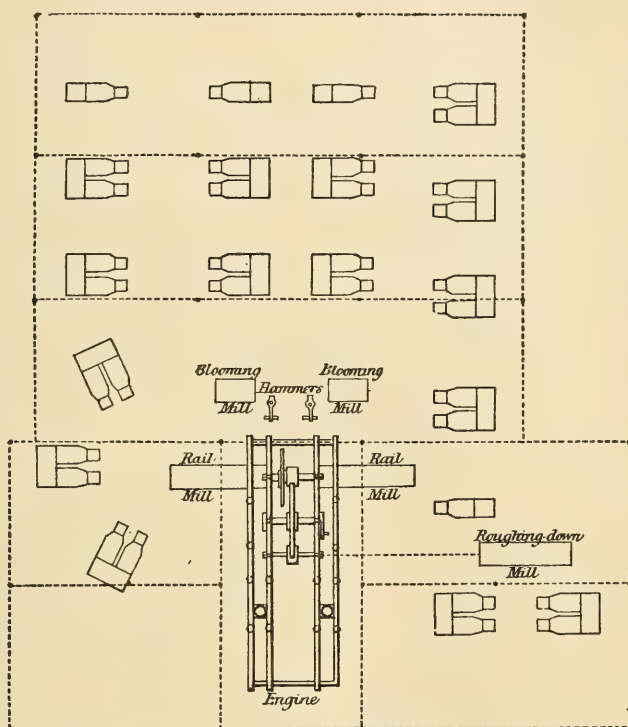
General Arrangement of Rolling Mill. Ground Plan.
